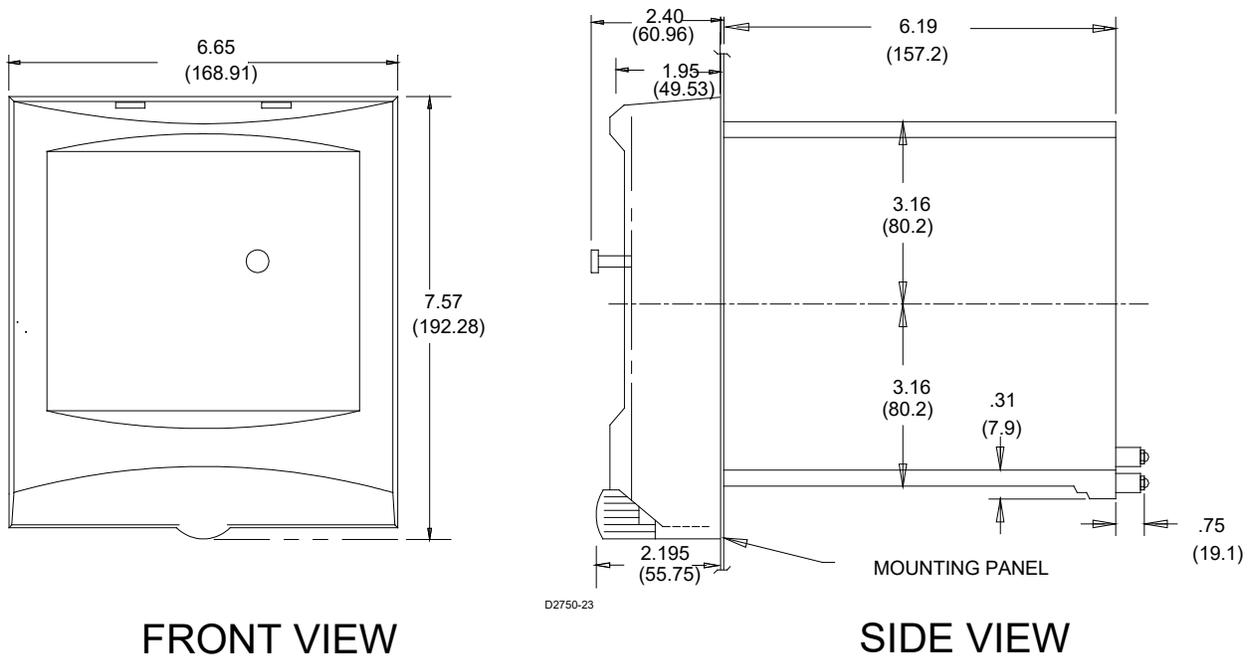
Outline Dimensions, A1 Case (Semi-Flush Mount)
